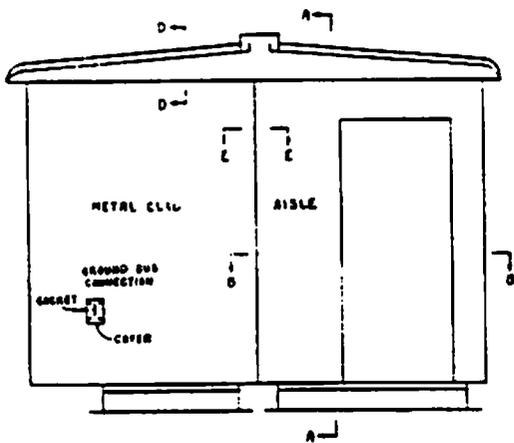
(545D856) OUTDOOR METAL-CLAD SWITCHGEAR - ADDITION OF UNITS TO LINE - UP.
